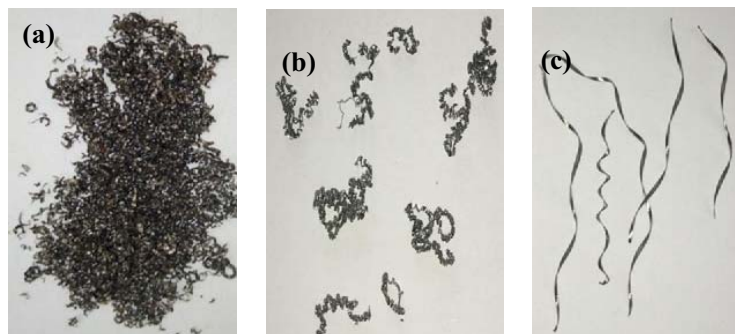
Chips formed during machining of Ti-6Al-4V (a) Dry (b) Wet (c) Cooled
